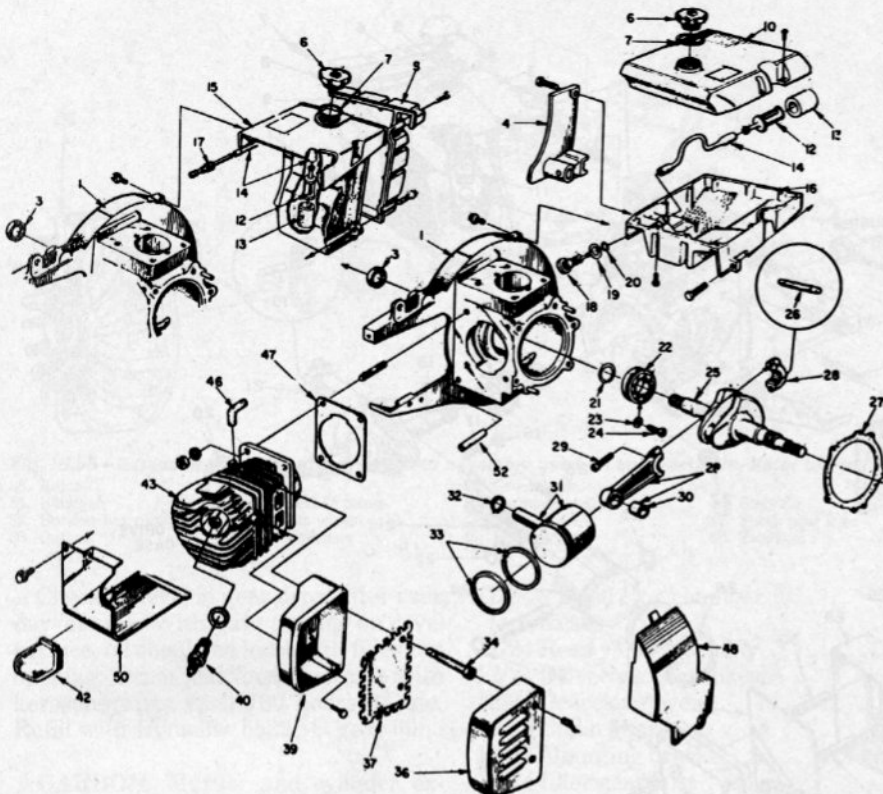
Exploded view showing Model S1050 Auto and Model S1130G engine assembly. View shows fuel tank construction for both the direct and gear drive models.
